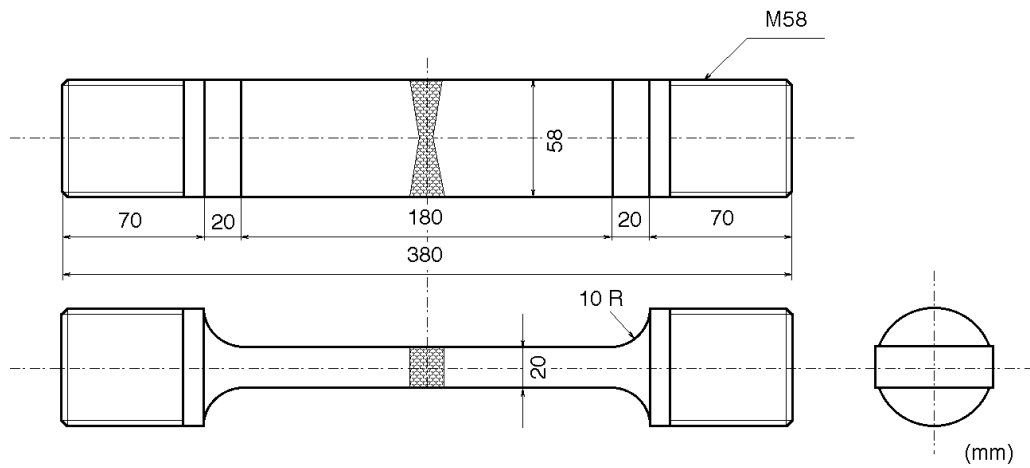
Geometry of full-thickness welded joint specimen (304WJ-S).
